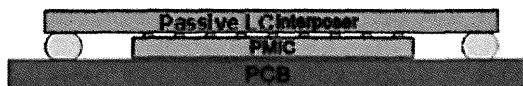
Integrated power converter incorporating a PMIC flip-chipped to a passive LC interposer. The assembly uses a mother-daughter chip scale package assembly to produce a 2.5D PwrSiP.
